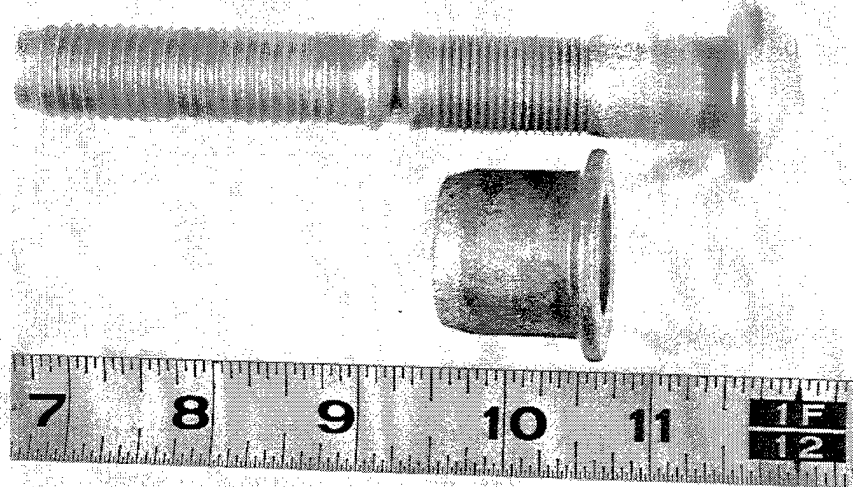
A typical roundhead aluminum Huckbolt fastener consisting of the 3/4-in diameter aluminum pin with the locking grooves next to the smooth shank, the grip stem at the end of the pin, and the flanged aluminum collar. Note the large notch in the center of the pin where the stem will break during the installation of the fastener like a "pop" rivet.
